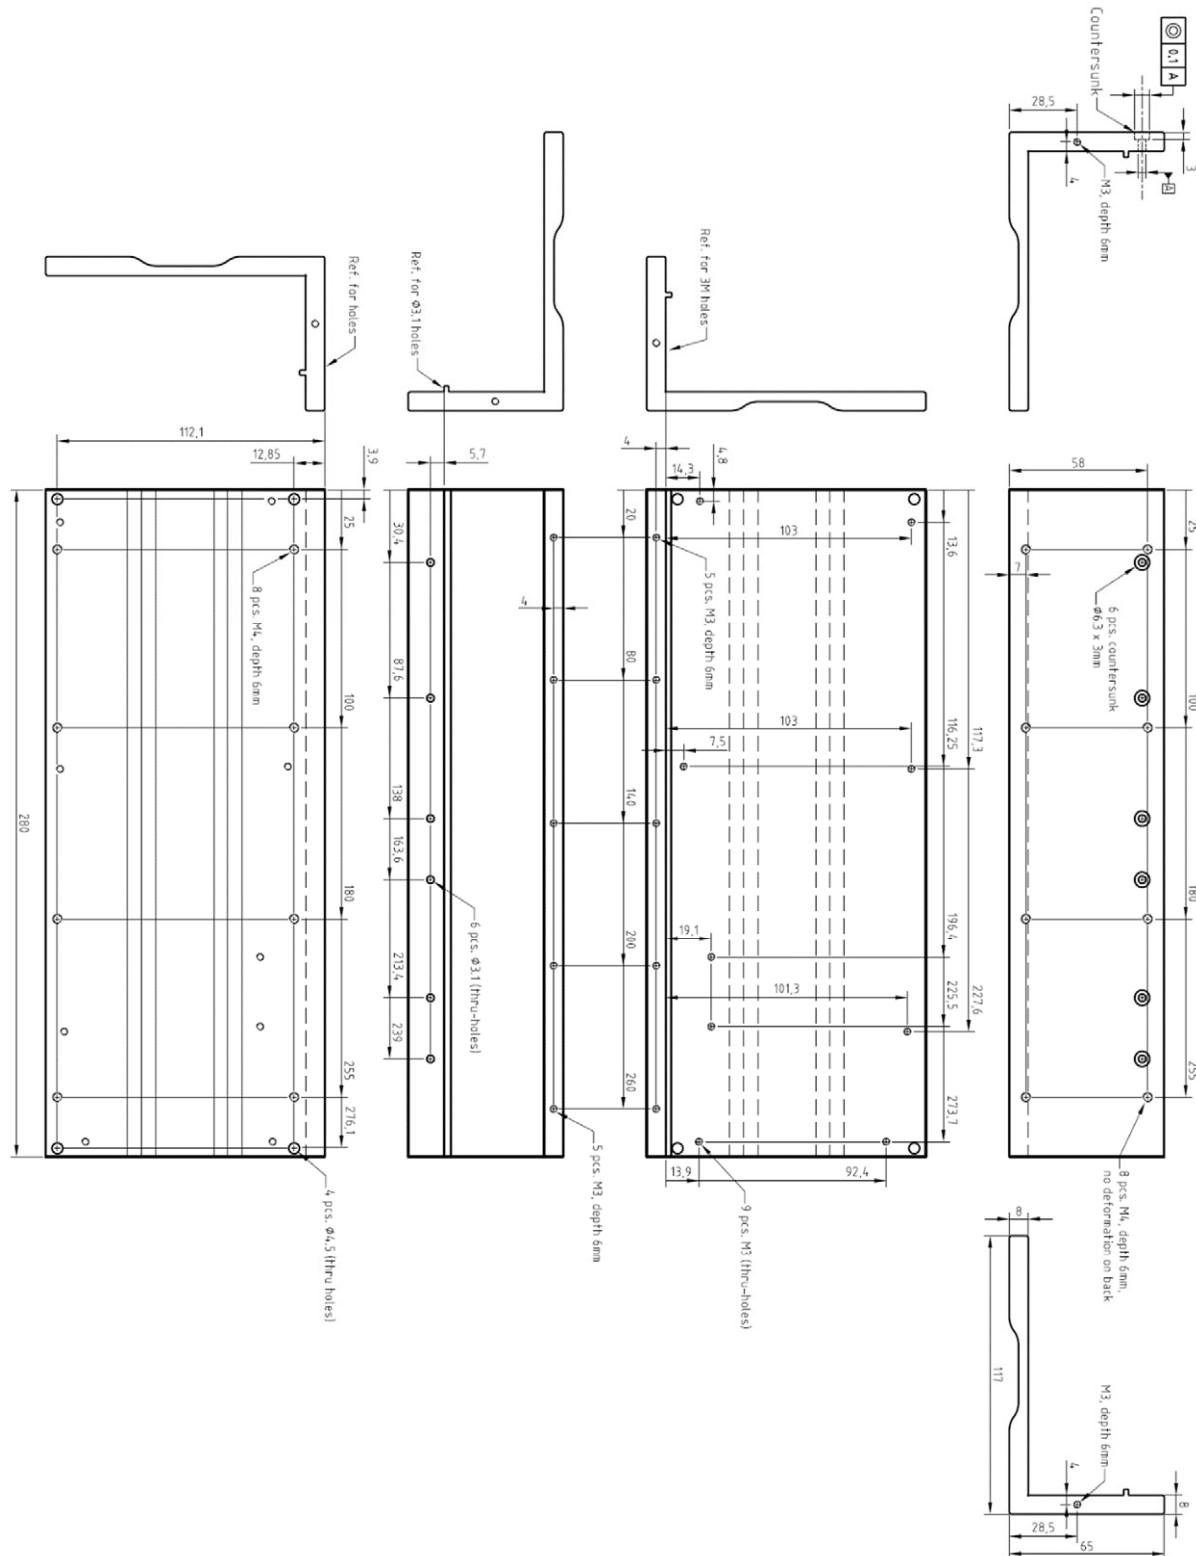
Mechanical dimensions of the X-PRO1 heat sink - All dimensions in mm
